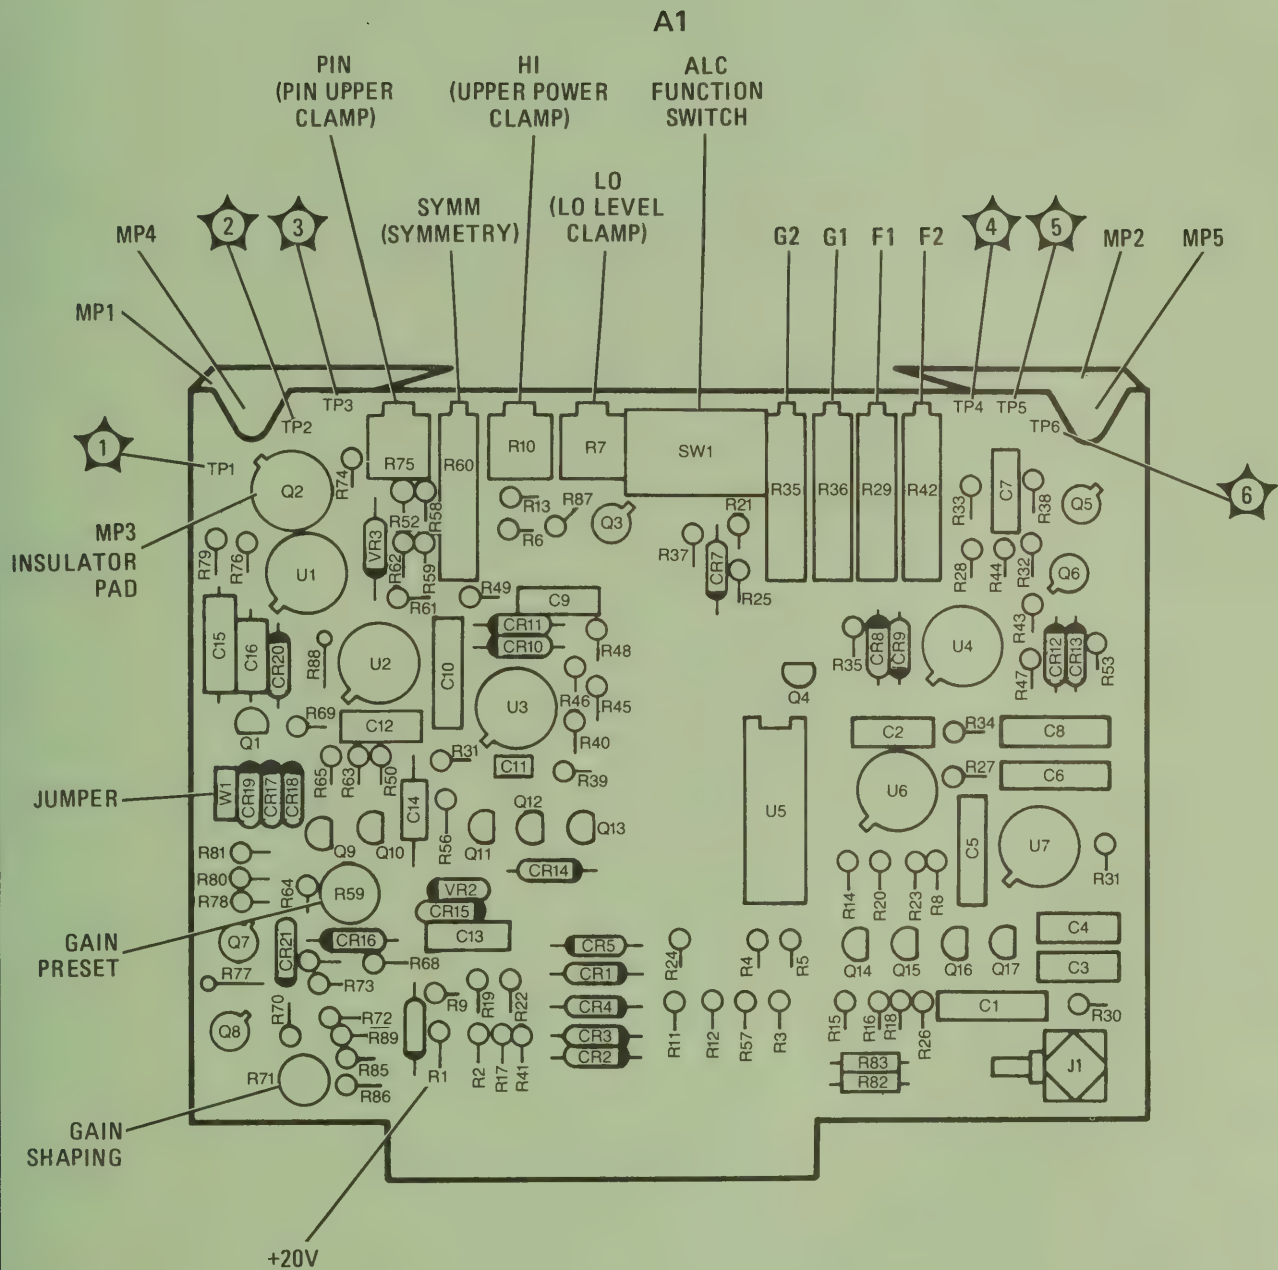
A1 ALC Assembly, Component Locations (CHANGE C)
